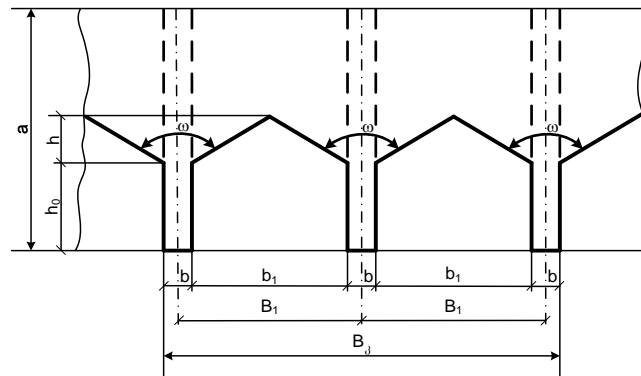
Scheme for determining the parameters of the working organs of the combined car baking machine baking machine.
